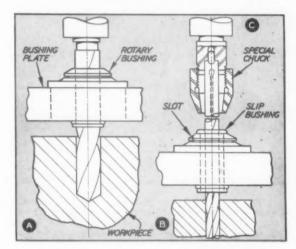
, shows at A and B applications of rotary bushings. Because of their close fit around the drill, these bushings prevent "walk" and the wear that would ordinarily result from the use of plain bushings. Sketch B shows how the rotor or a rotary bushing may be slotted for holding while inserting and removing slip bushings. Sketch C shows a special chuck, such as may be used to hold small diameter straight-shank drills.
